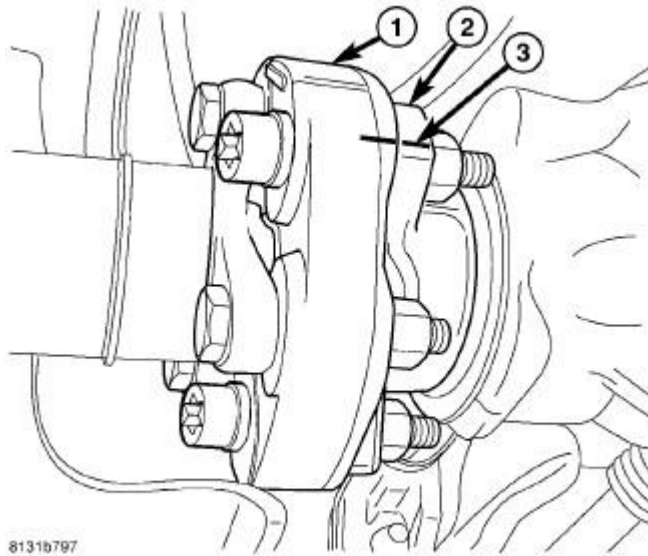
Axle Flange, Rubber Coupler & Index Marks
